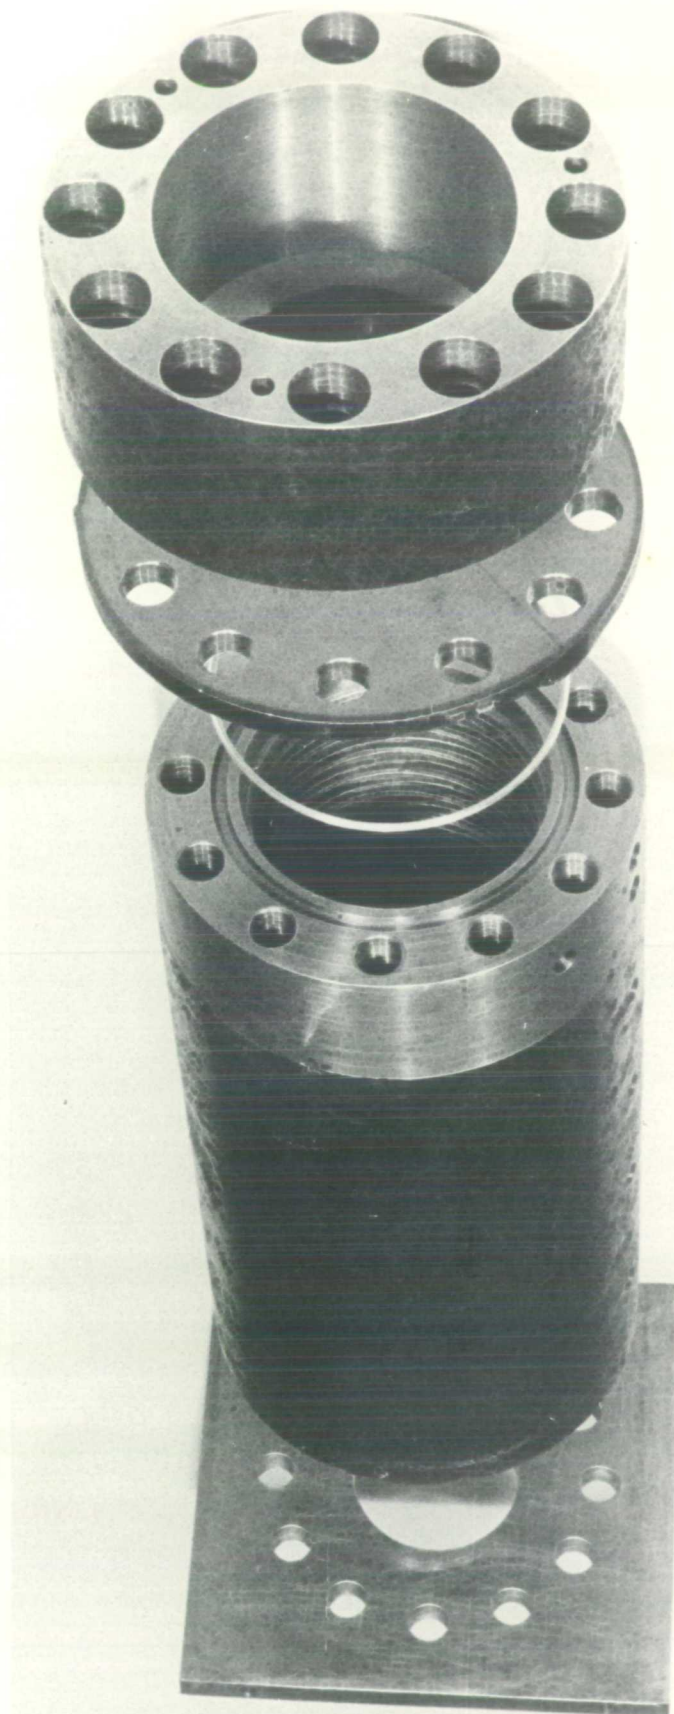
EXPLODED VIEW OF "LINER TEST SERIES" CELL
